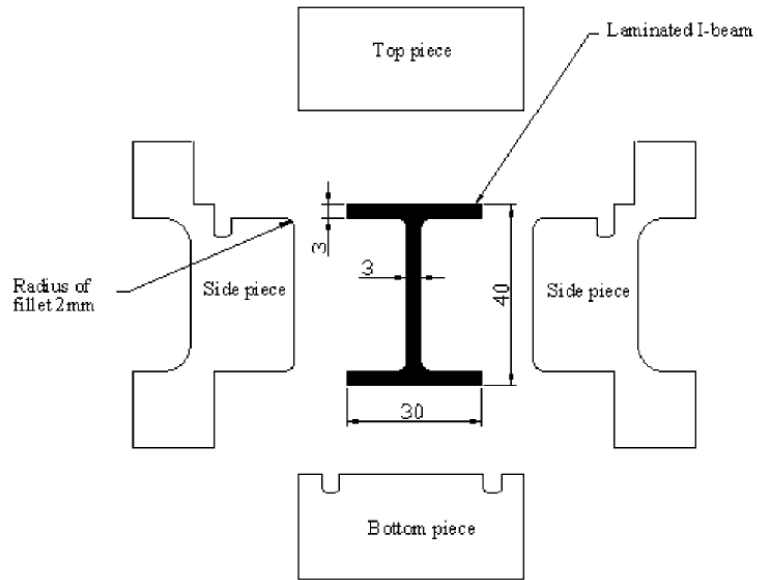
The unassembled schematic of the 4 piece mold used for fabricating the I-beam.⁸
